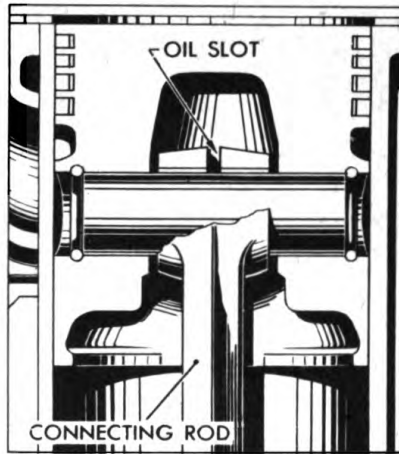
Connecting Rod Bearings and Timing Chain Oiling
